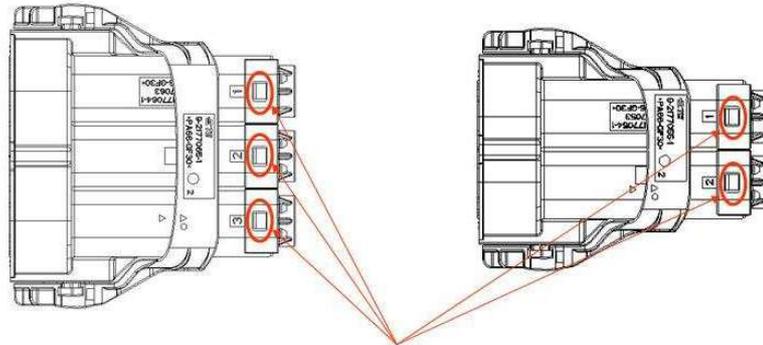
Assembly 2pos. connector/Montage 2-pol. Stecker
